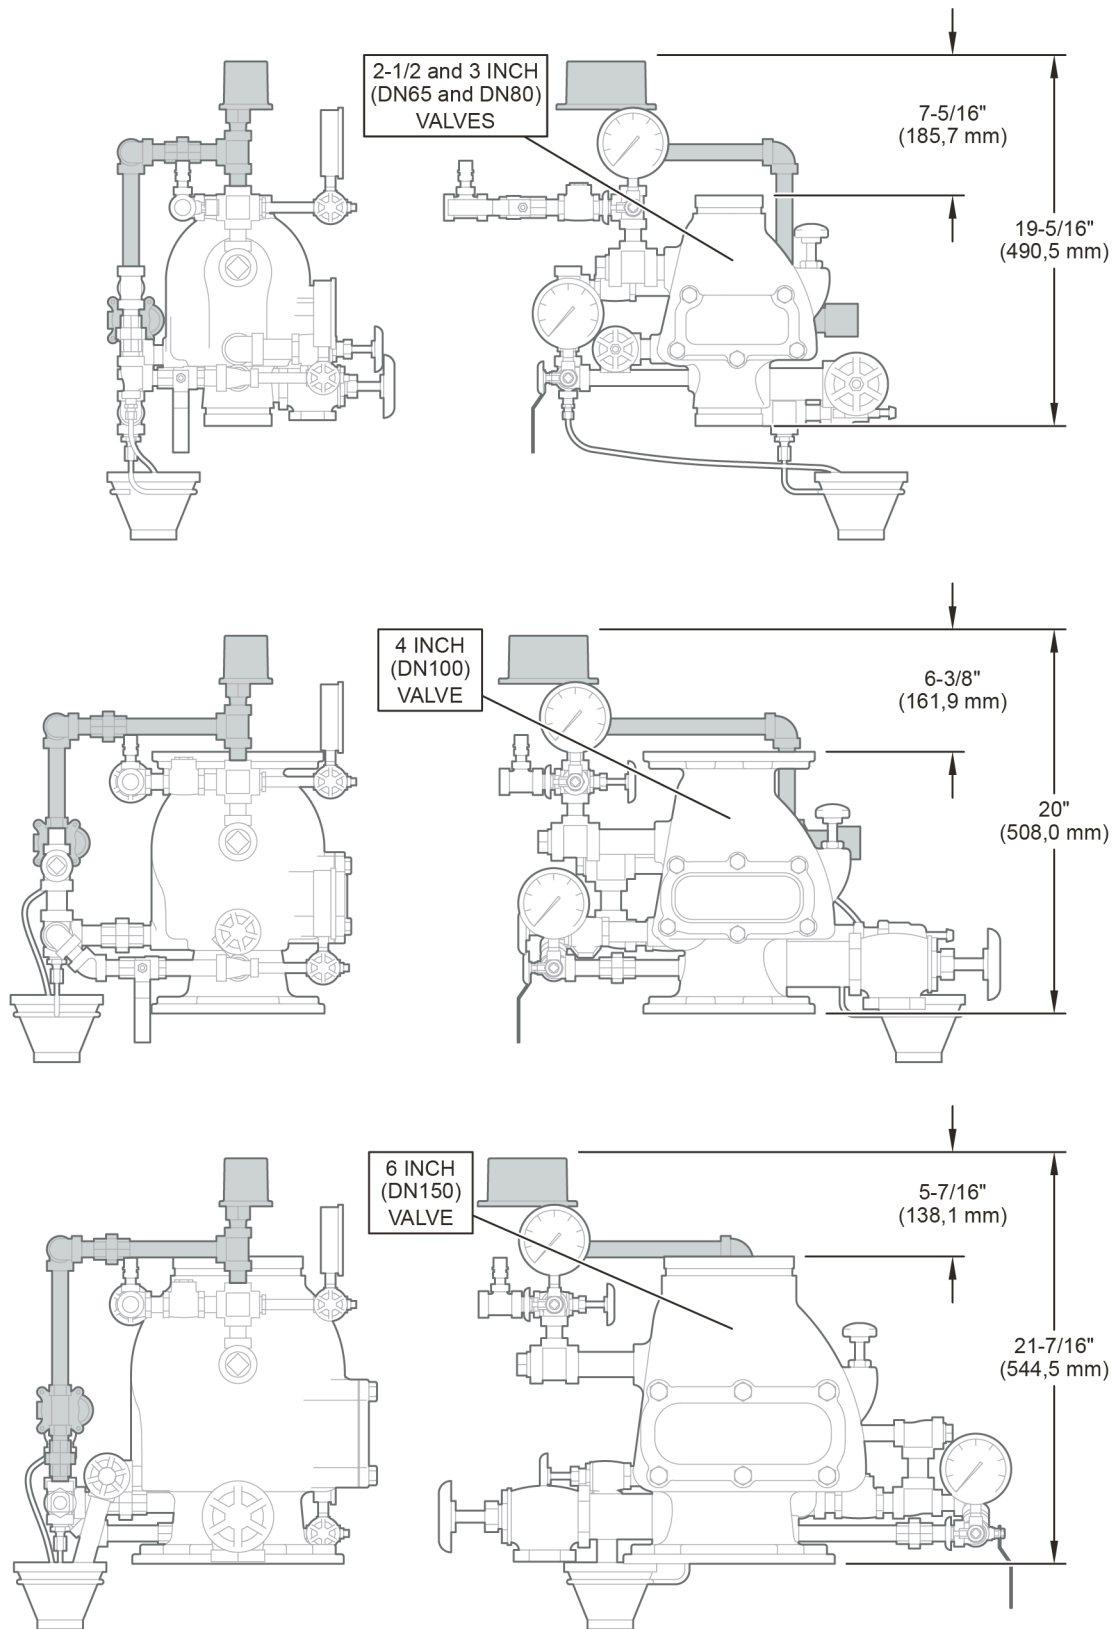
4 in to 6 in. (DN100 to DN150) DPV-1 dry pipe valve with European conformity trim and Model QRS-2 Electronic Accelerator installation dimensions
